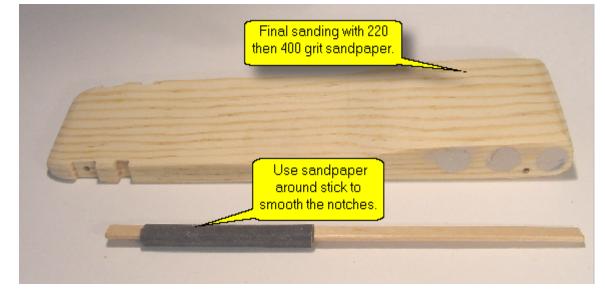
Body after final sanding. There should be no sharp edges or corners.
